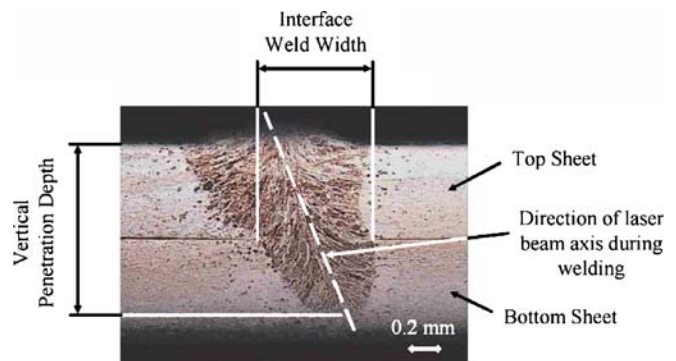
Cross section of a directional remote-laser lap weld
